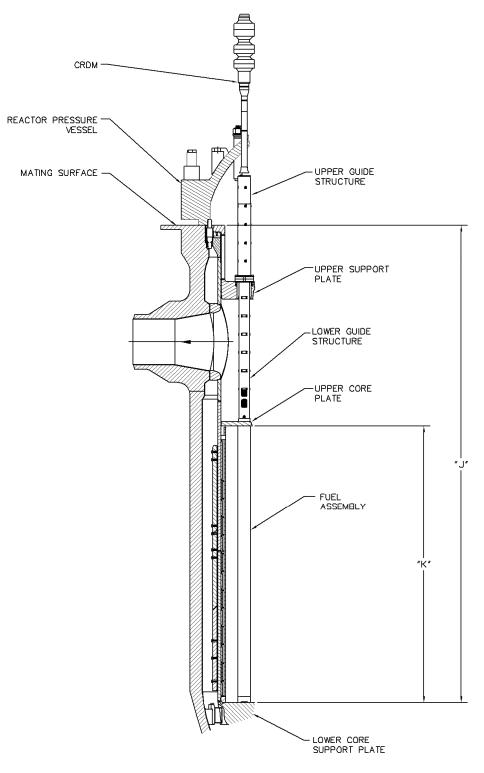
Rod Cluster Control and Drive Rod Arrangement
